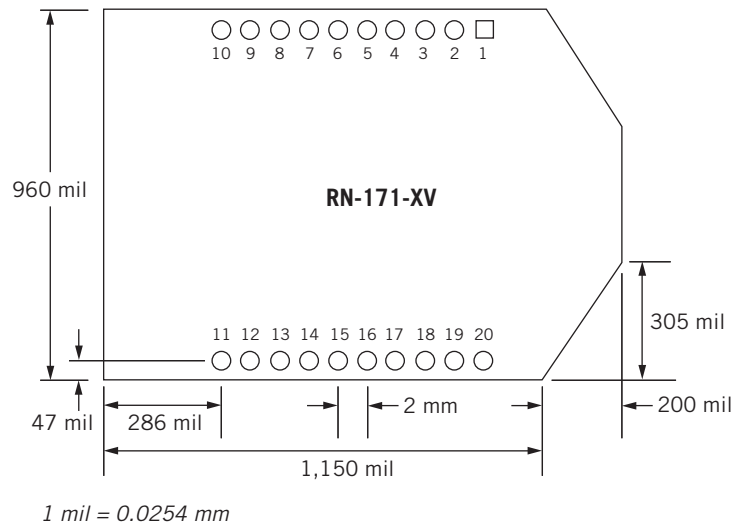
shows the pin pads and dimensions. Table 7 describes the pins.
